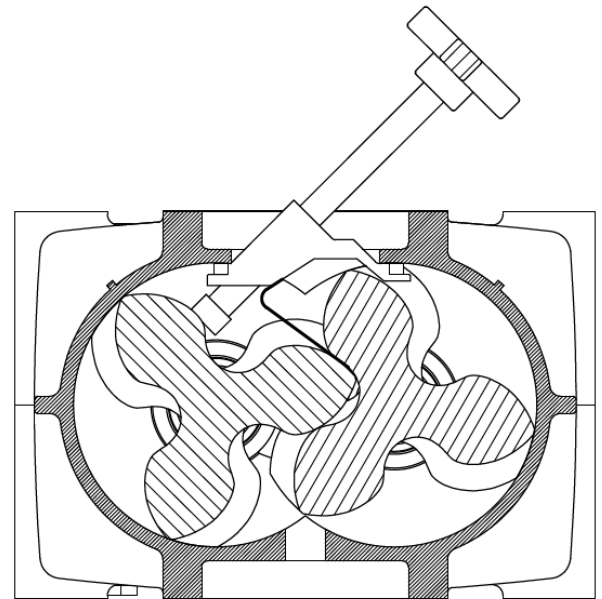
ROTOR LOCK ASSEMBLY
